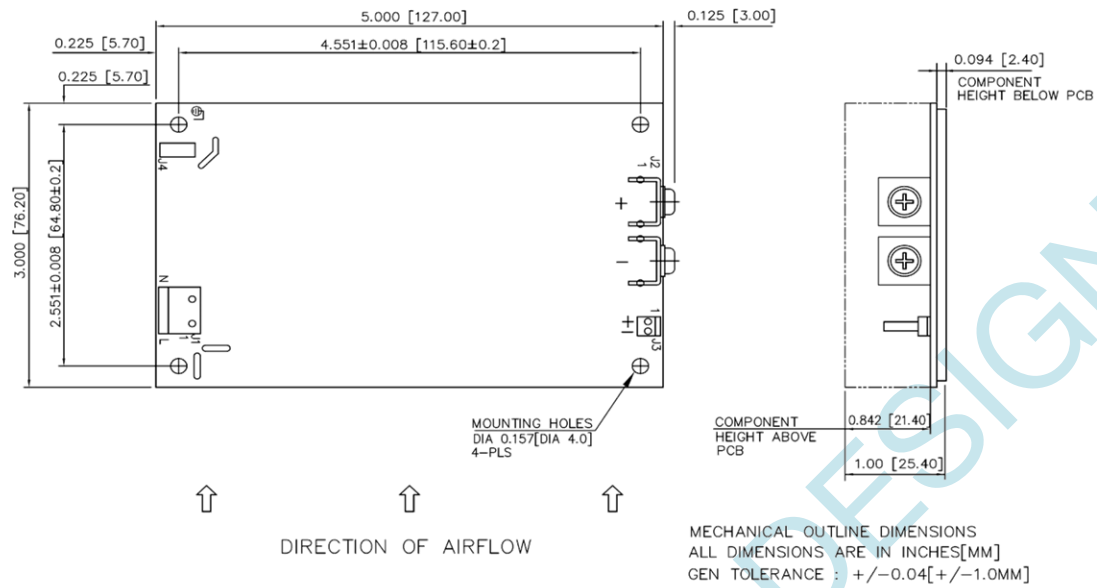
Mechanical Drawing - Screw Terminal (Option 1)
